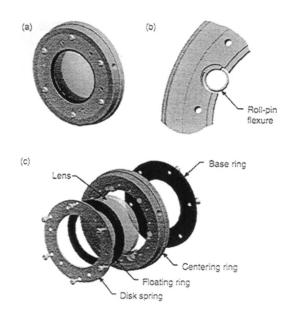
A lens mount with both axial and radial compliance. (a) The assembly, (b) detail of the radial flexure, and (c) exploded view. (From Barkhouser, et al.²⁷)
